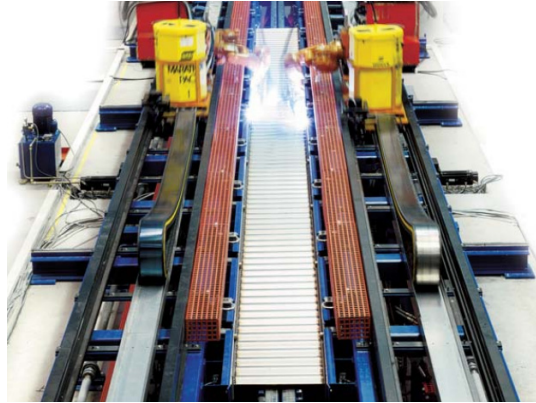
Corrugated steel plates being welded to flanges at Zeman International plant in Austria, forming corrugated web steel beams
